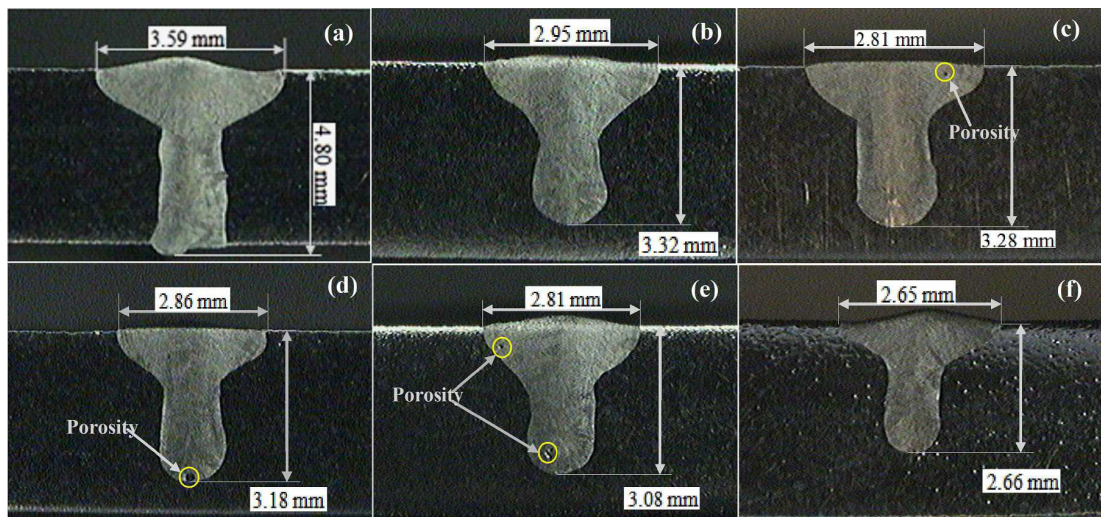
Macrograph of Bead on plate produced by Nd: YAG continuous Laser welding with 2 KW power. (a) 550 mm/min; (b) 600 mm/min; (c) 650 mm/min; (d) 700 mm/min; (e) 900 mm/min and (f) 1200 mm/min.
